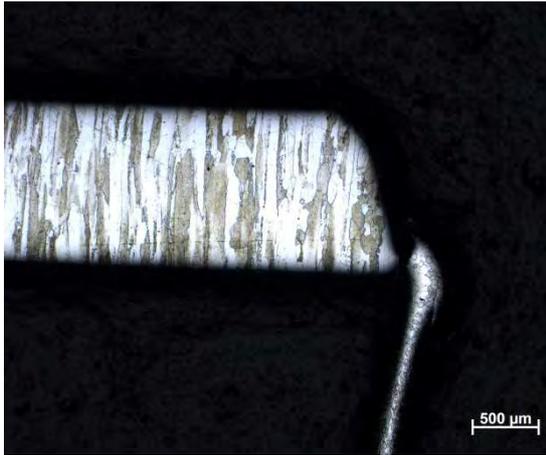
Evaporation and spattering of welded material in the case of a higher welding current SQ ($TIME = 80$ ms; $SQ = 50$ mA)
